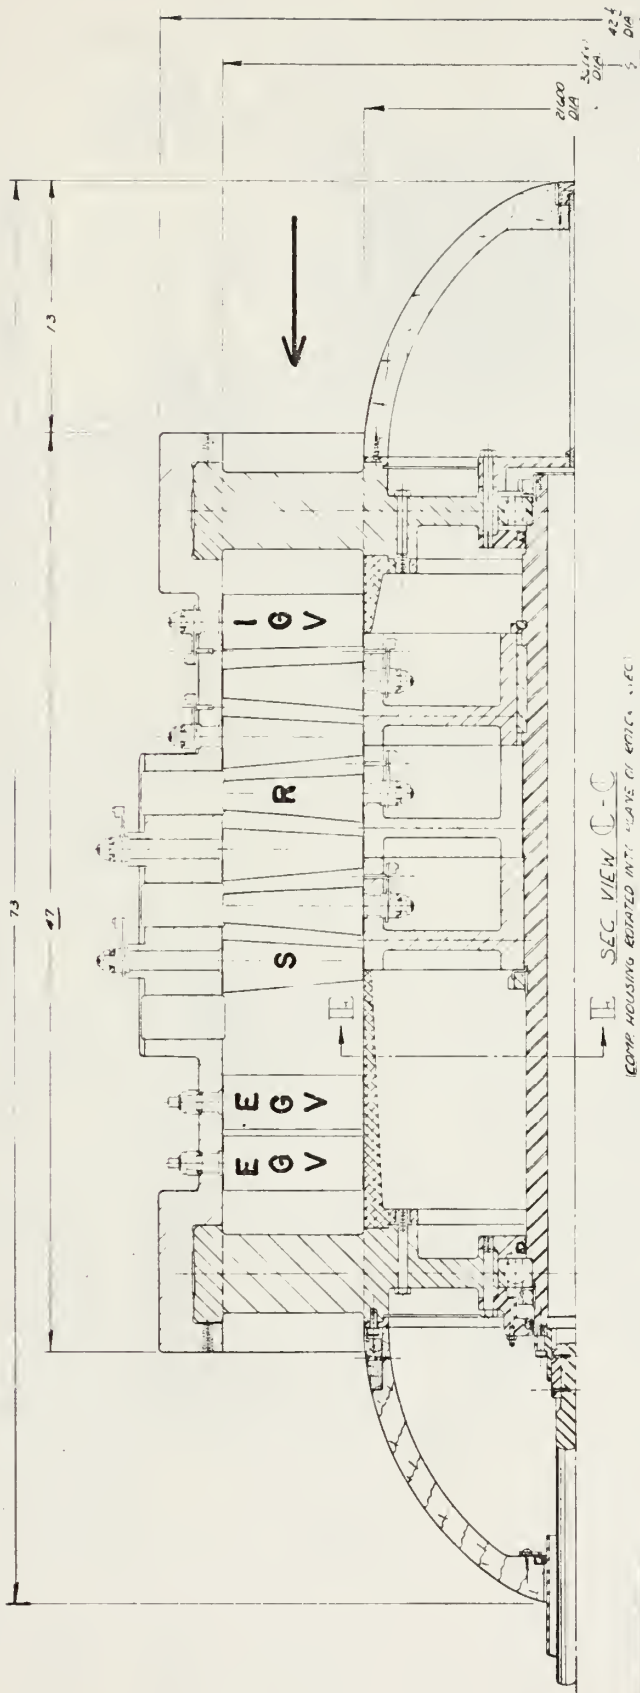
Compressor Sectional View Showing Installed Rotor and Stator
